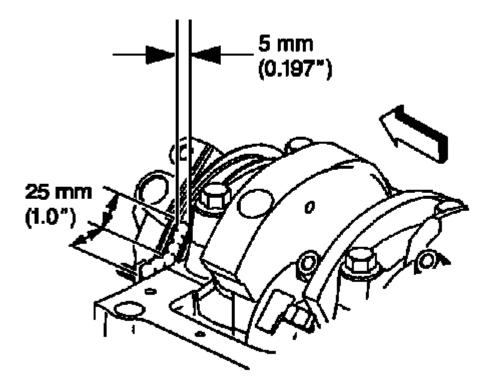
View Of Oil Pan Gasket Courtesy of GENERAL MOTORS CORP.
